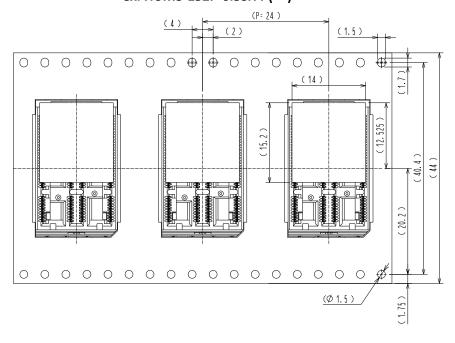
Embossed Carrier Tape for IT9 Receptacle (dimensions in mm)
